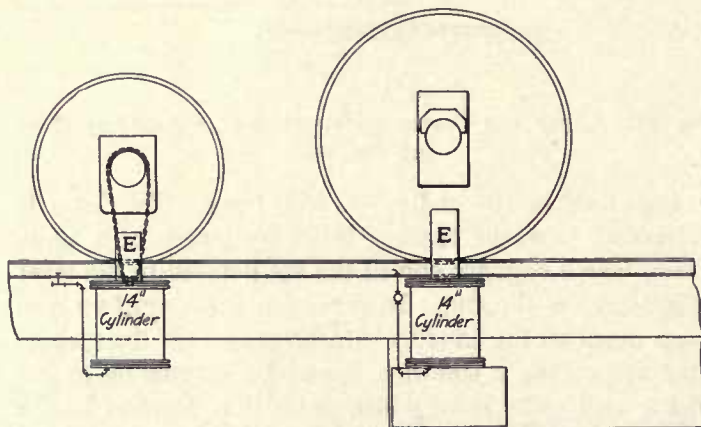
Pits and Jacks for Removing Journal Bearings.
